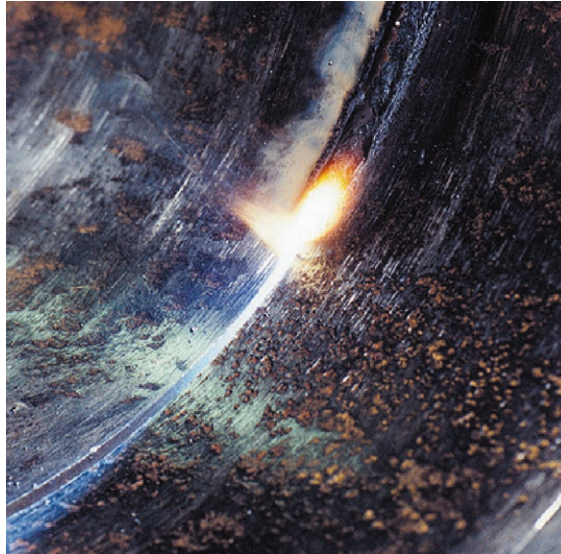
Inside of 8 in. x 0.372 wall API 5L-X52 pipe, welded in 5G position. Photo shows open root welded in the 3 to 6 o'clock position.
